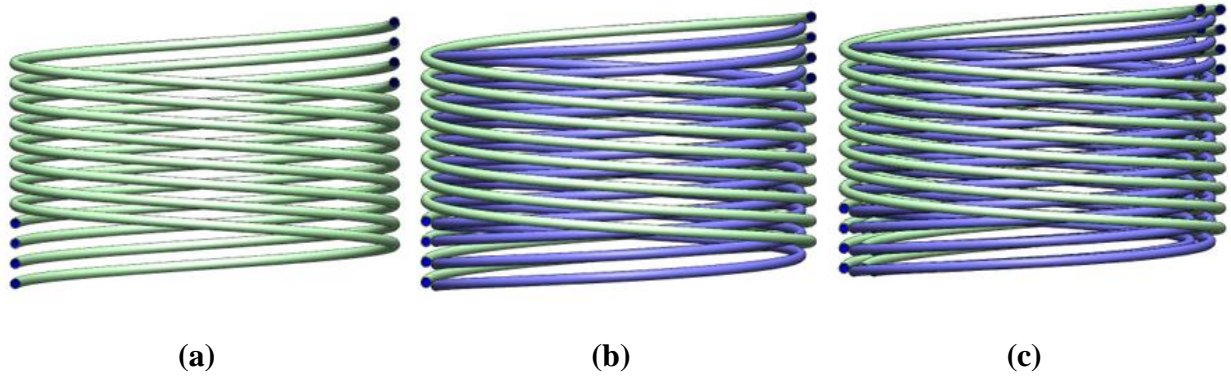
Design of a helical coil steam generator starting from a) a single helical tube bundle, b) two counter-coiling tube bundles and c) a series of concentric helically coiling tube bundles
